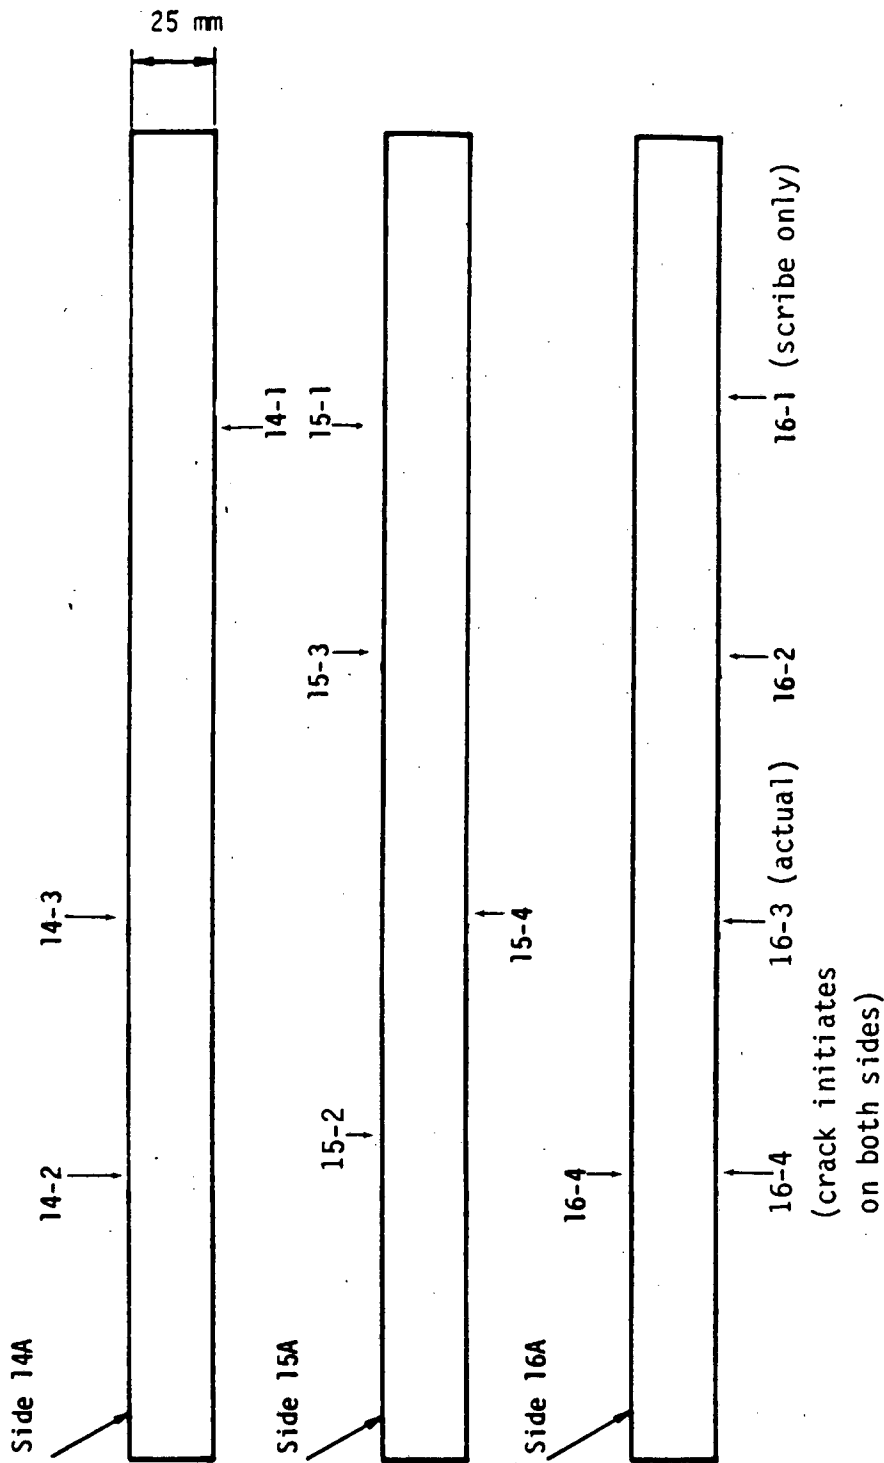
Steel Test Blocks #14, #15, and #16 With Start Locations for Fatigue Cracks. Plates are 100 mm wide.
